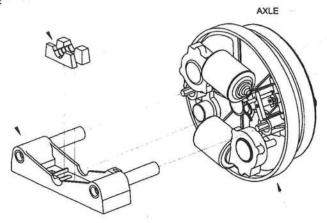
EO KIT TO DRUM ASSEMBLY
